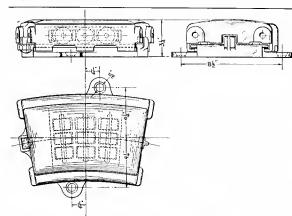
Creco Covered Roller Side Bearing for Freight Car Trucks.
